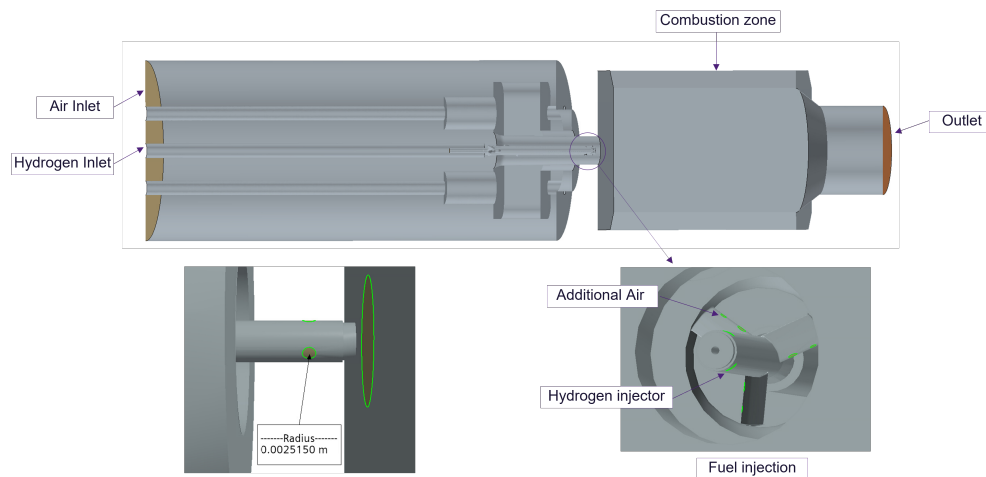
Cut section of the geometry with air and fuel inlets, injection, combustion zone and outlet.
